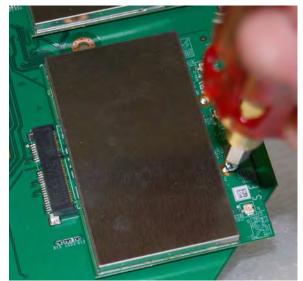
Secure the 802.11ac WiFi Radio Module in to the PCIe card
